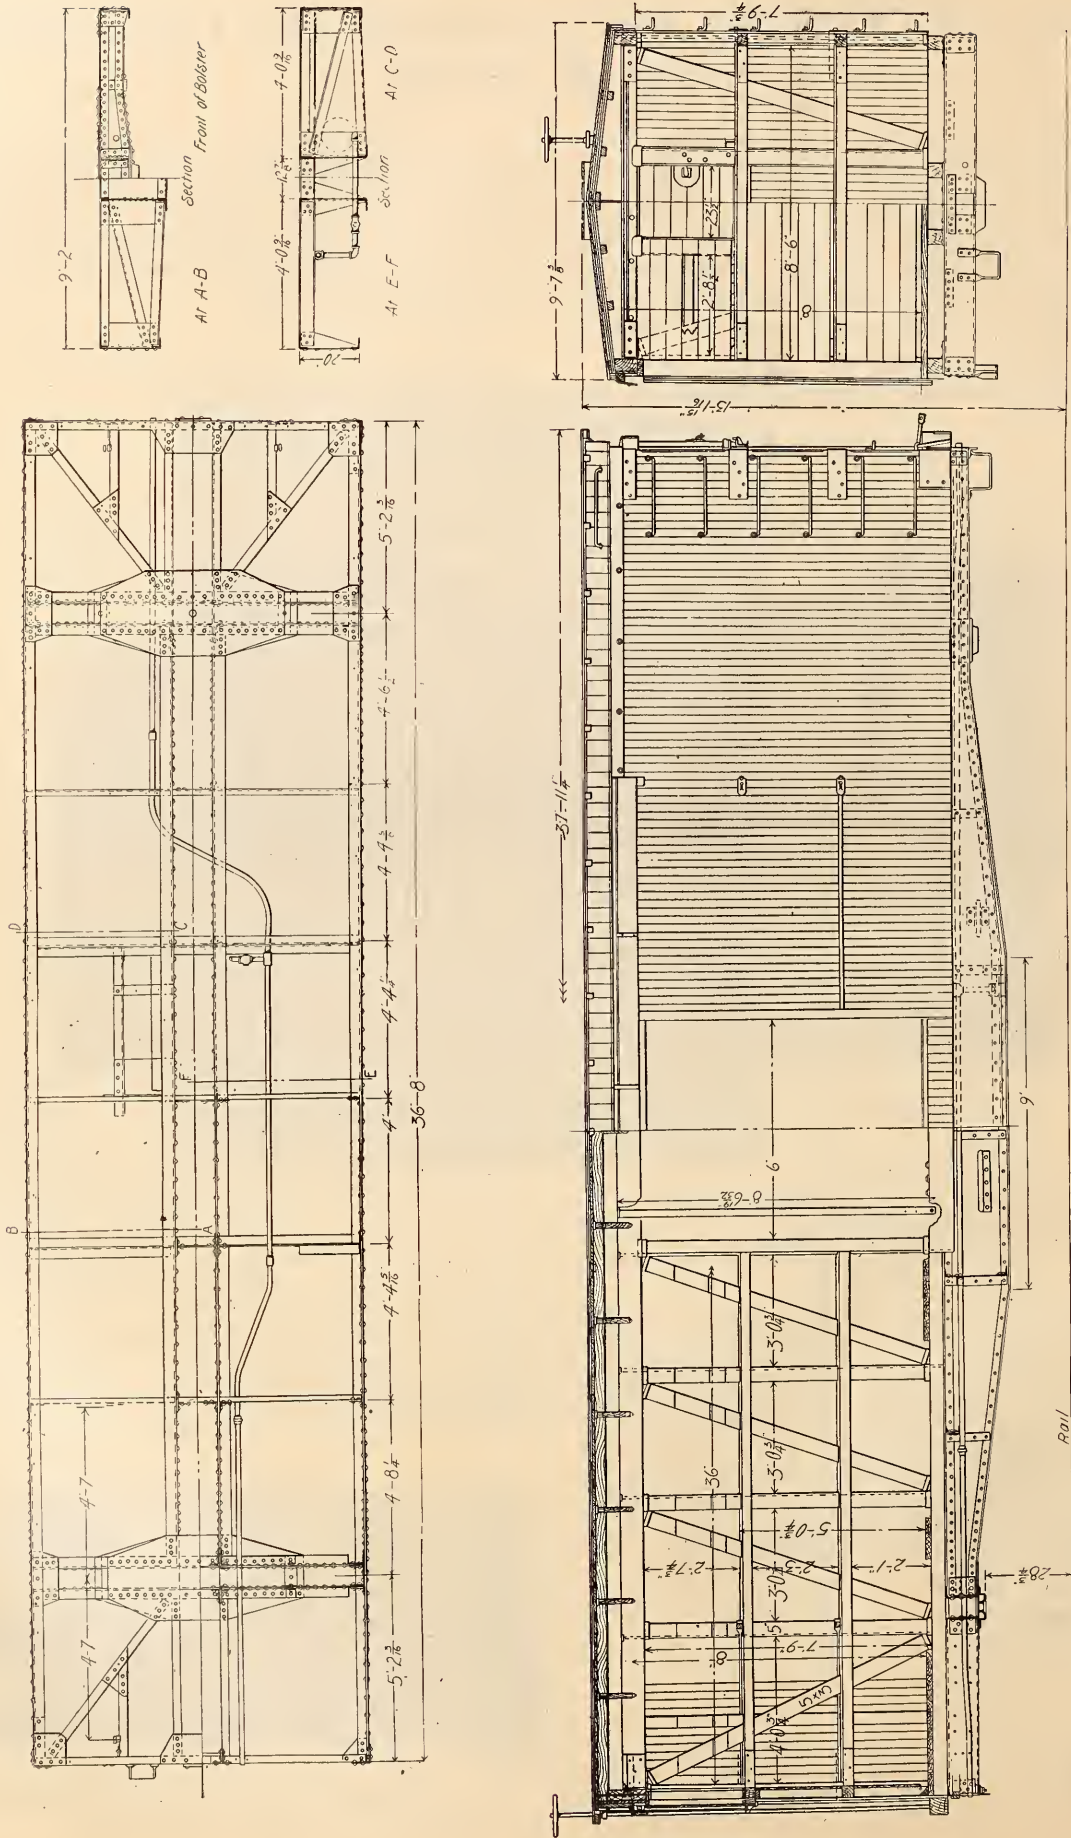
PLAN, ELEVATIONS AND SECTIONS—80,000 LBS. CAPACITY STEEL UNDERFRAME BOX CARS—ILLINOIS CENTRAL RAILROAD.
